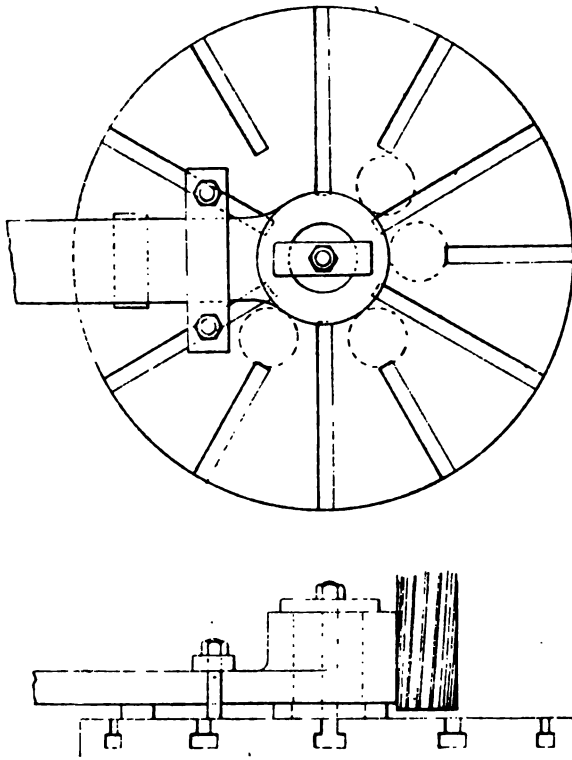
Illustrates Value of Circular Table for Boss Milling.
